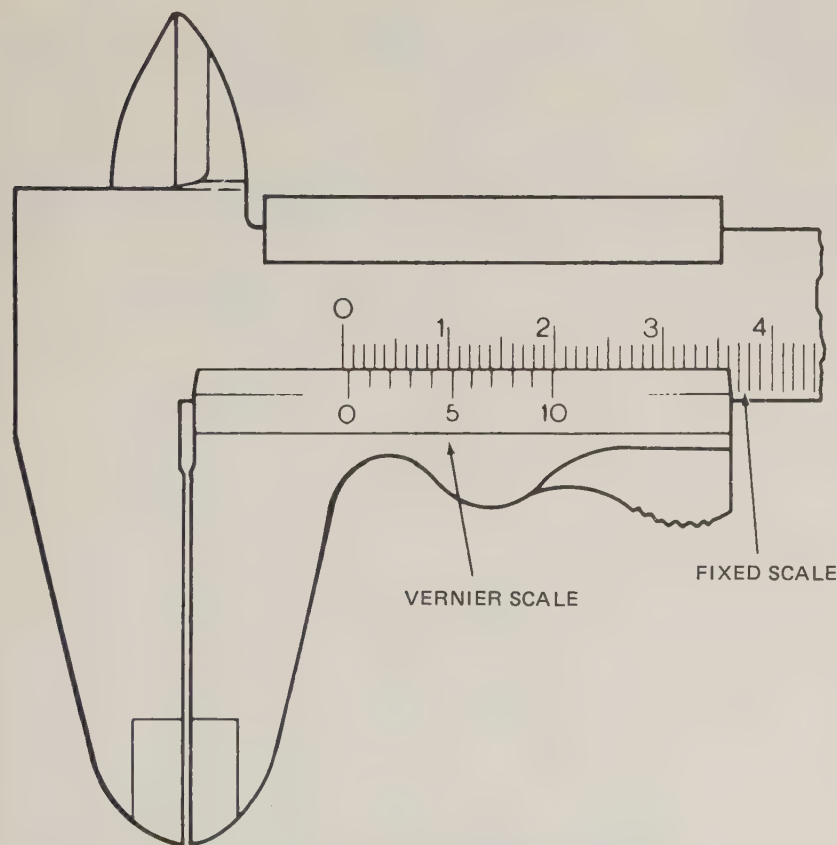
A simplified metric vernier caliper. (Volkswagen of America, Inc.)
